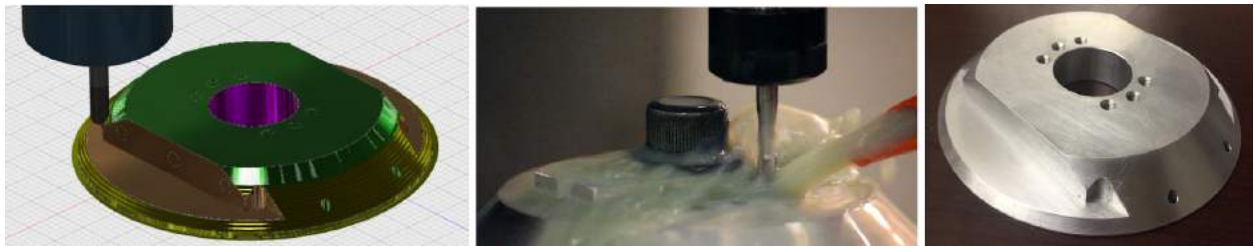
CAM simulation (Left), Actual CNC Machining (Center), Finished Part (Right).
